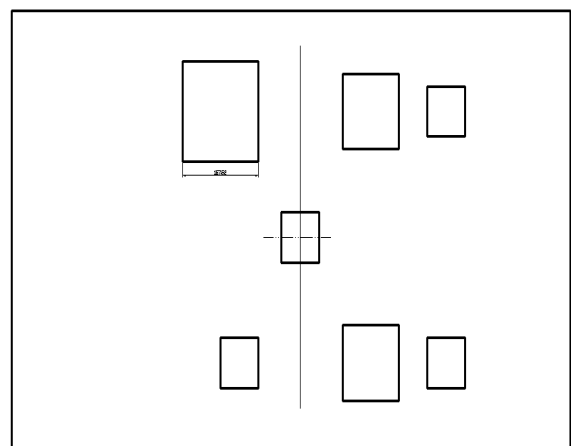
shows the location of the models on the moulding plates (the location of the parts in the casting mould, respectively). Figure 6 shows aspects of mould manufacturing and of the casting process.
